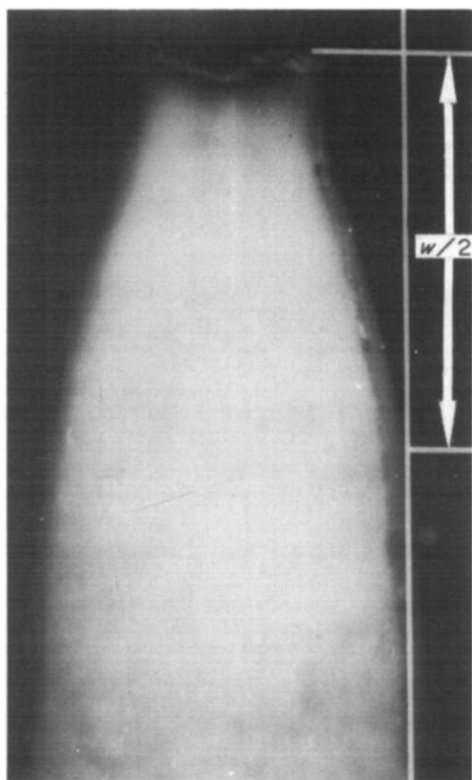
Cross-section perpendicular to the crack path at a crack length of 12 mm
